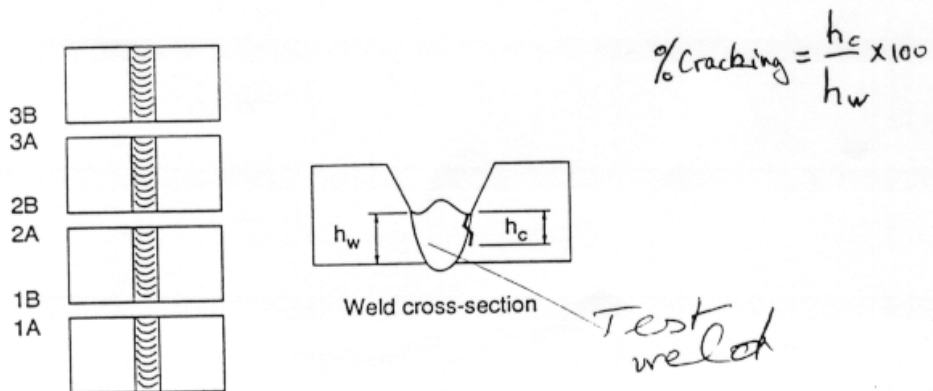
Schematic representation of the Y-groove (Tekken) testing fixture setup (a) and crack length measurement principle (b).
